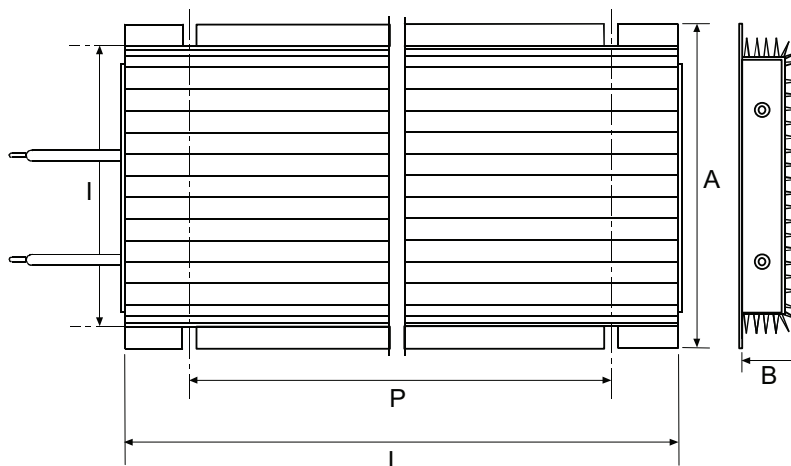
Overall dimensions and technical features resistor 75 Ω /1300W
